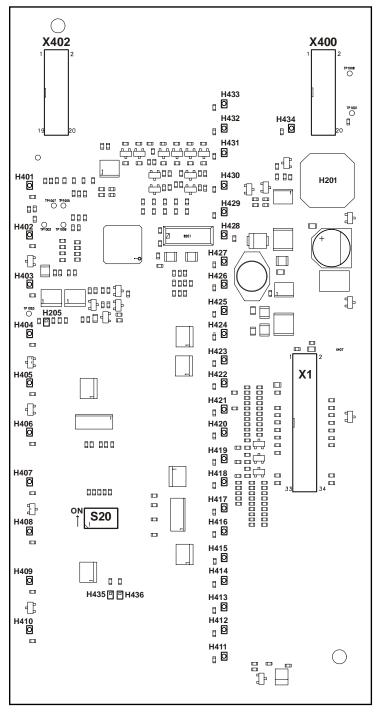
PCB view of EVAC-NL operating unit FTO2007-N1
